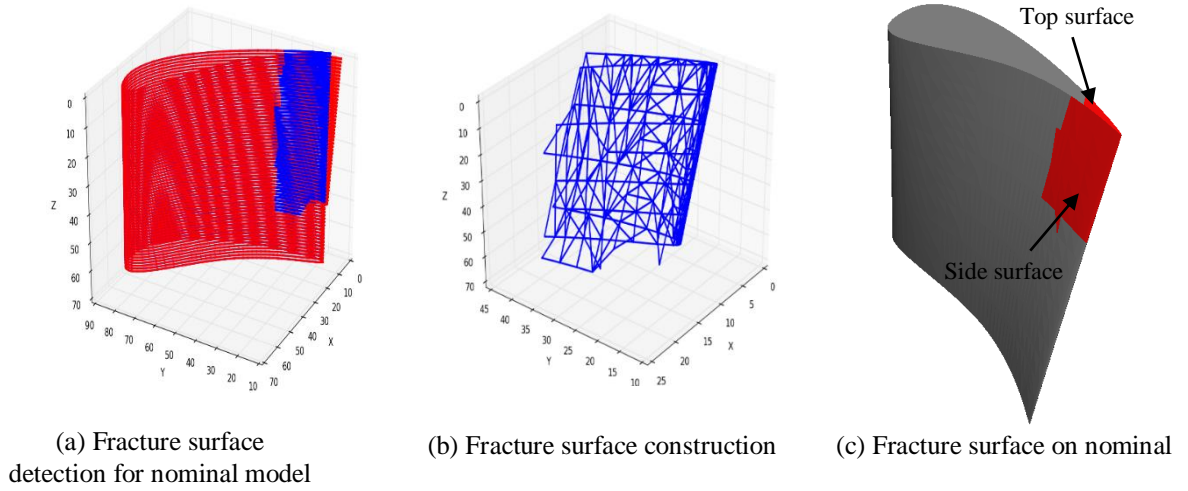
Fracture surface construction on nominal blade model
